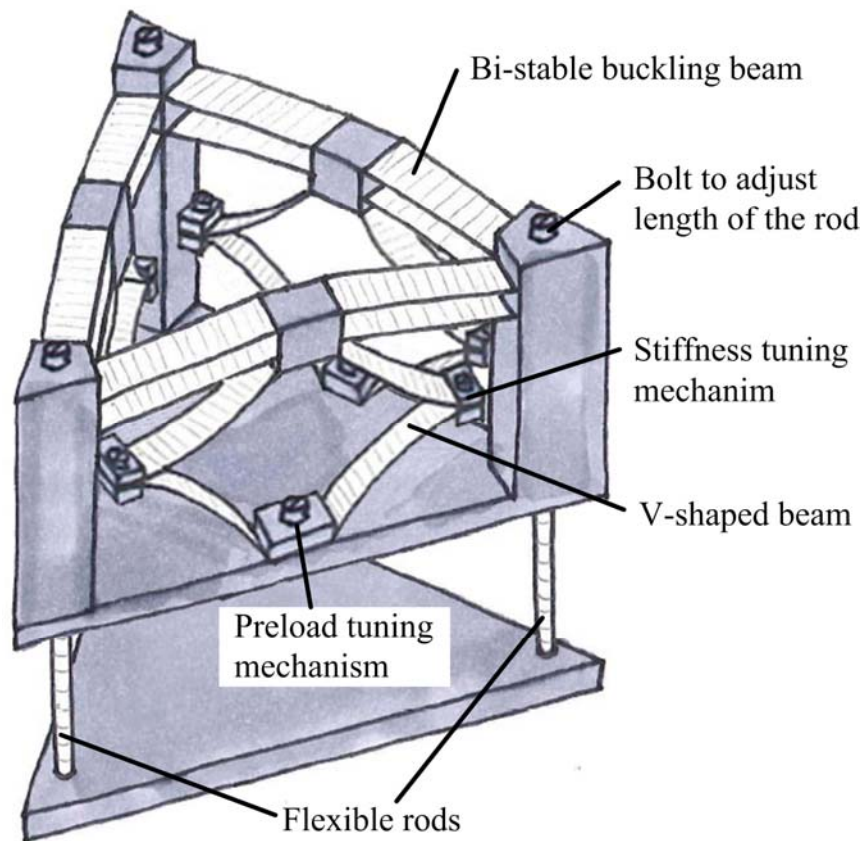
Drawing of the final conceptual design. The out-of-plane mechanism (three identical balanced mechanisms, consisting of multiple bi-stable buckling beams and v-shaped beams) is supported by the in-plane mechanism (three flexible rods), in triangular configuration.
